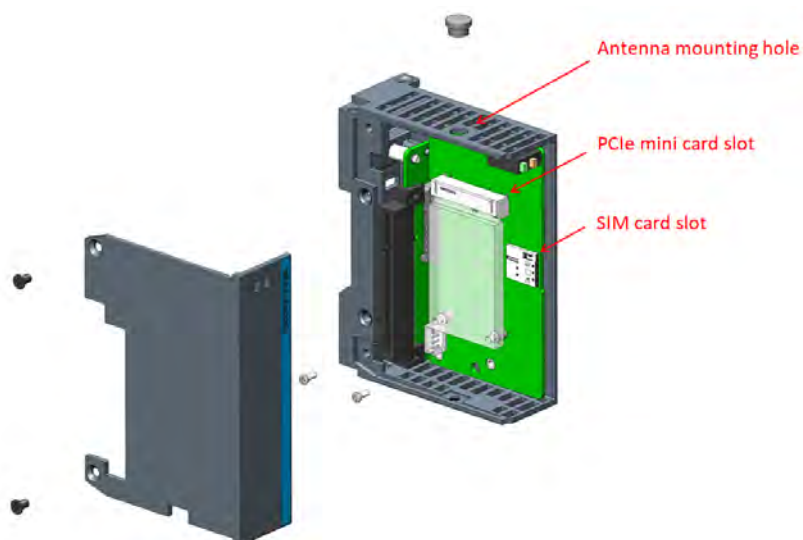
AMAX-5400E PCIe mini card installation guide
